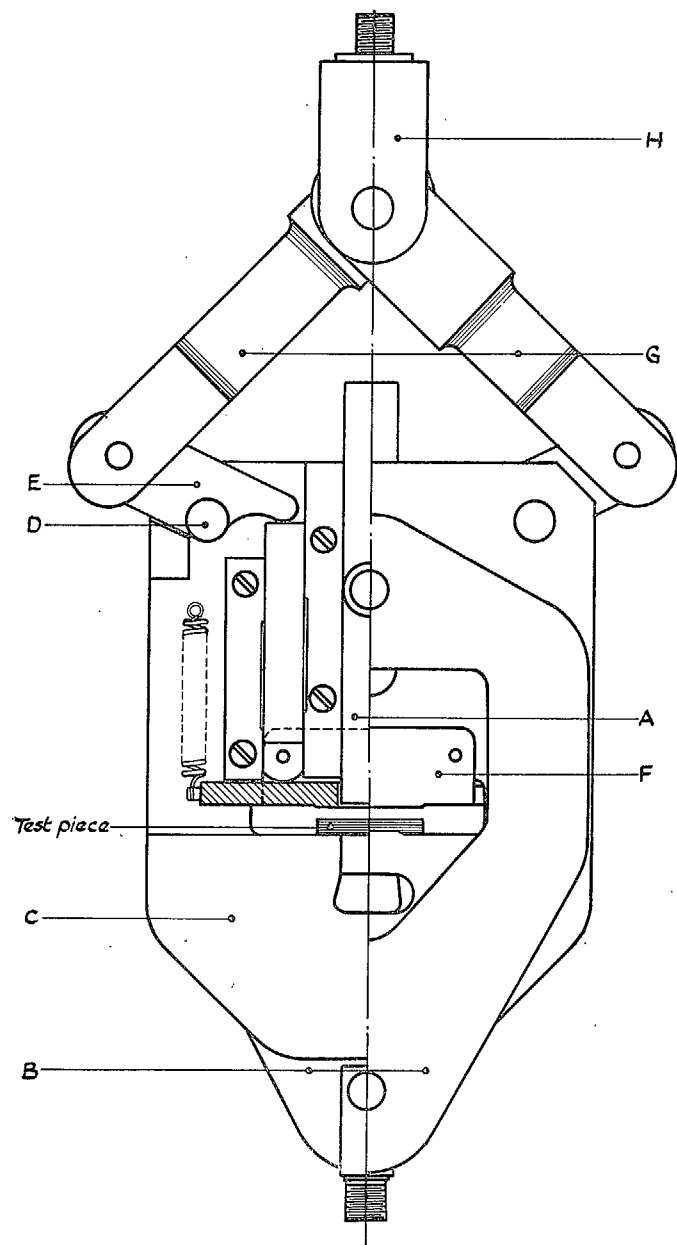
Shear test appliance arranged for automatic clamping of test pieces.
